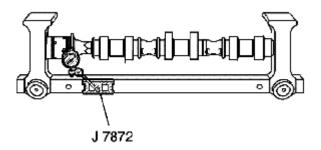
Identifying Camshaft Thrust Width Courtesy of SUZUKI OF AMERICA CORP.
